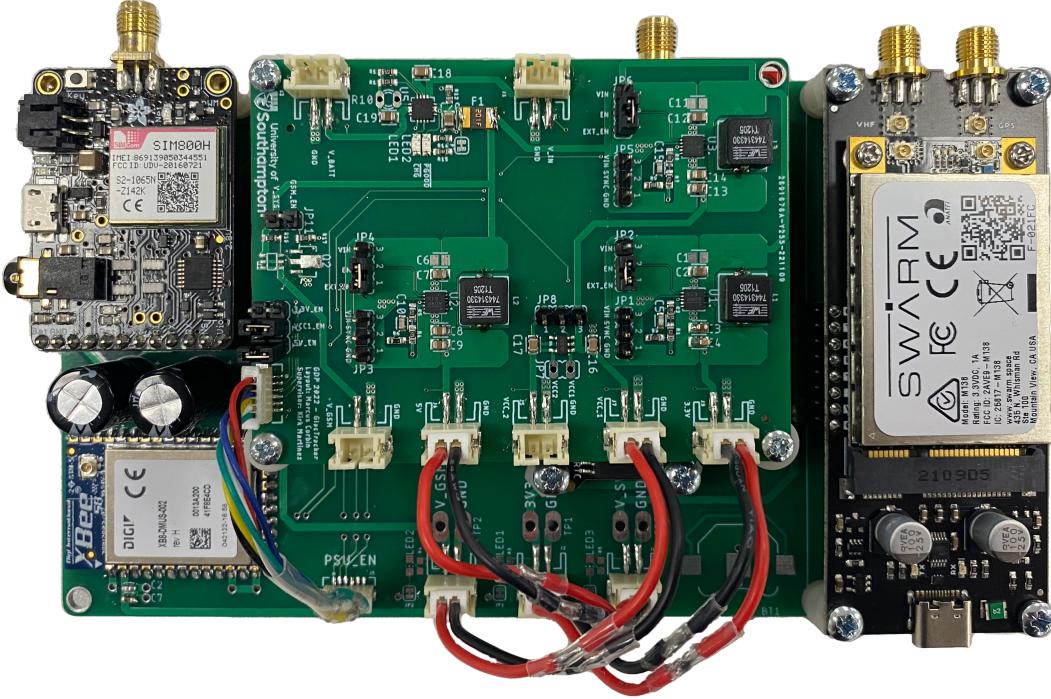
MCU PCB with PSU PCB mounted showing connections between them
